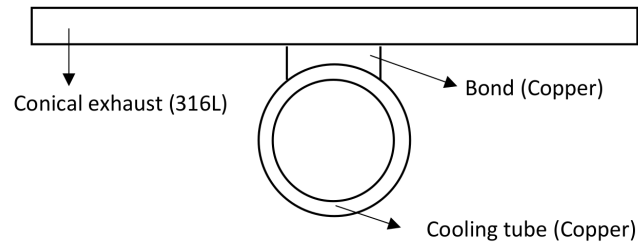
Wrapping of the exhaust with copper cooling channels
